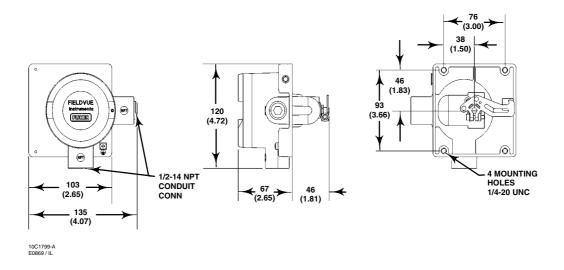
Dimensions for Remote-Mounted Instruments—Type DVC6005 Base Unit
